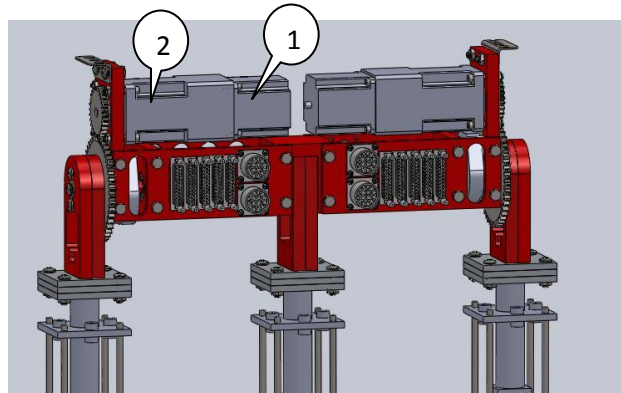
Independent hip drive design - uses a motor/gear train assembly for each outer leg.
